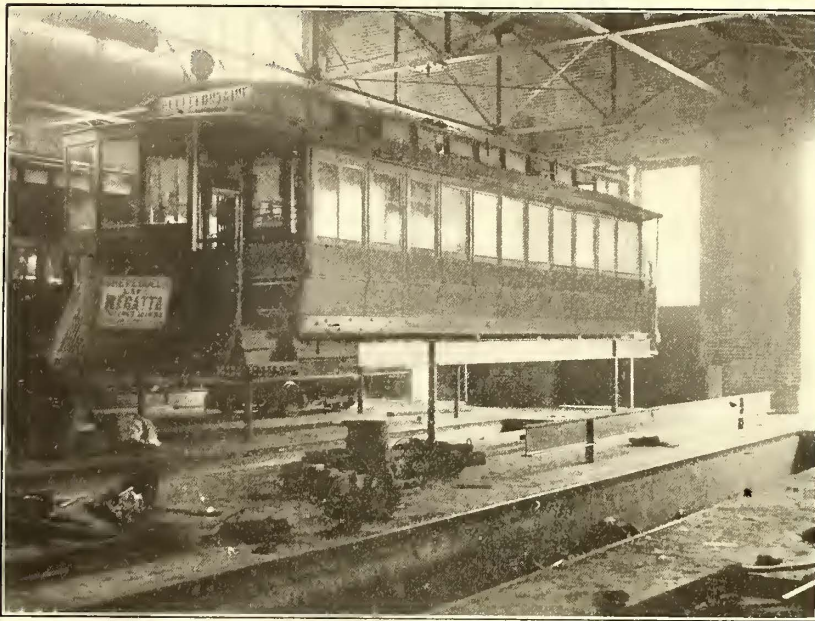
CAR ON HOIST OVER PIT TRACK
